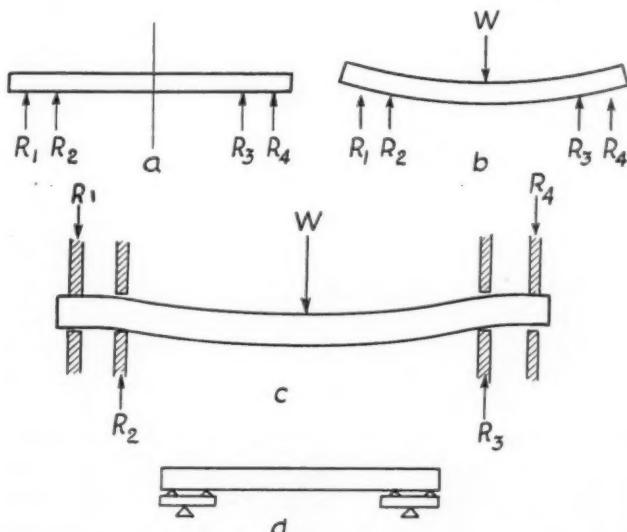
Conditions induced by beam loading with multiple bearings. Proper mounting for double or multiple row bearings is shown schematically at D
